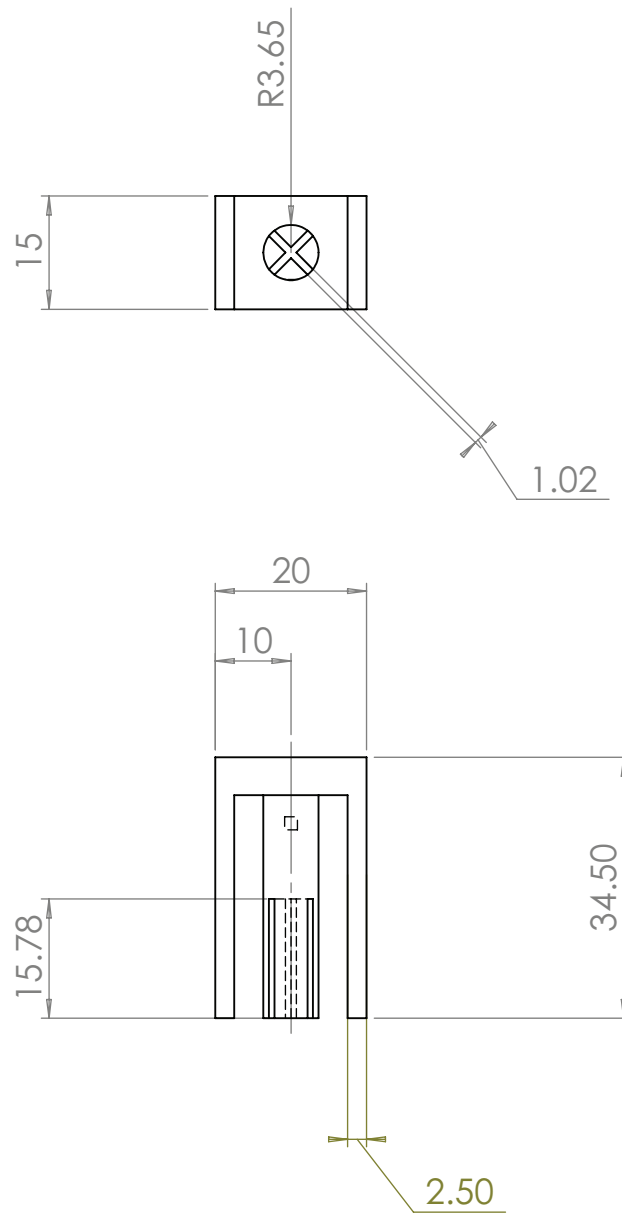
Polarizer adjuster tool. This tool is used to adjust the septum polarizer inside the waveguide feed. See Fig.A.4
